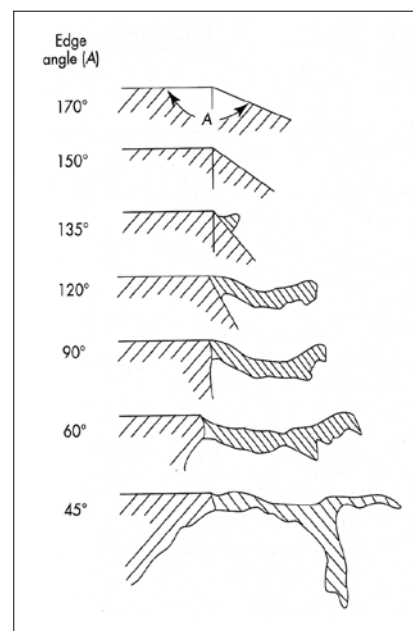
Cross-sectional view shows that large vertical edge angles minimize burrs. Large burrs form when machining over 30° edges, but when machining over 150° or larger edges, burrs typically do not form. Pictured are long thin burrs. When machining over an edge with larger angles, no burr protrudes.
